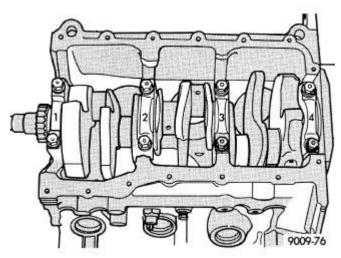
Main Bearing Cap Identification Courtesy of CHRYSLER LLC
